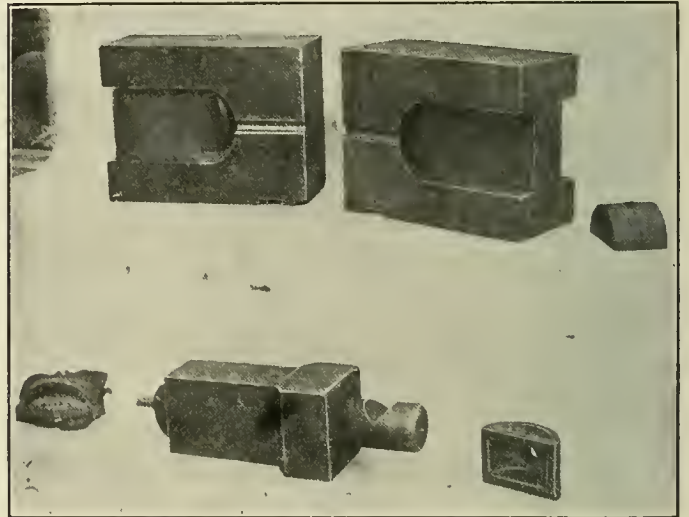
DIES AND FORMER FOR DRAWBAR YOKE FILLER.
